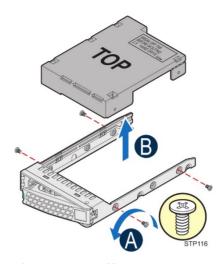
3.5" Hard Disk Drive Installation – Removing the Drive Blank
